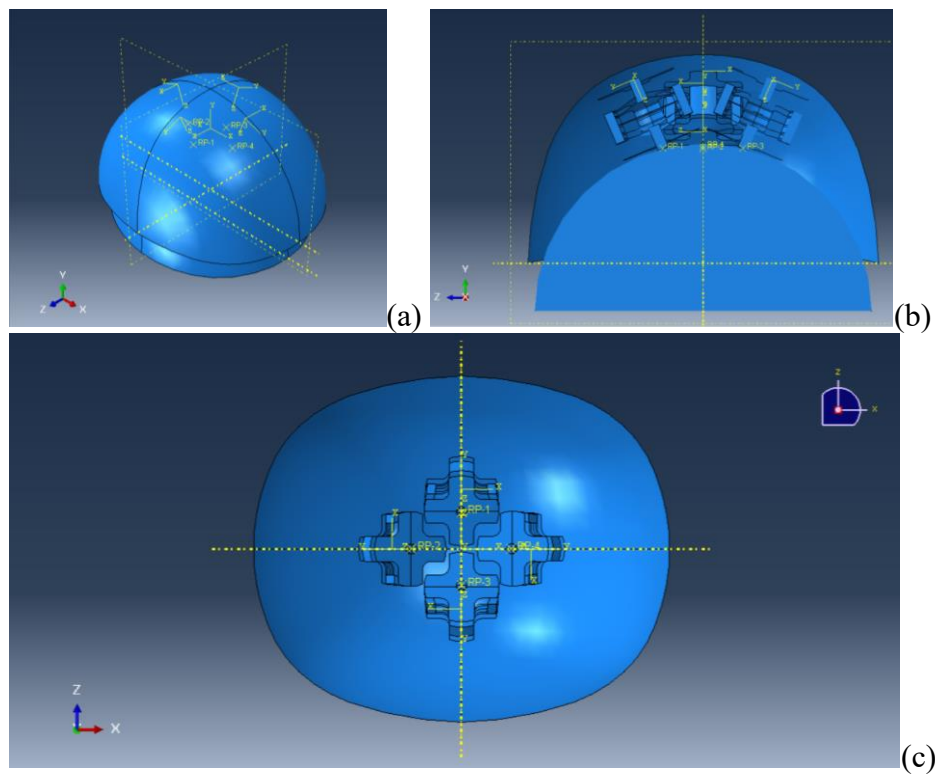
Assembly of the conformal elements, head form and helmet shell- (a) Isometric view of the assembly, (b) Section View, (c) Elements positioned on the helmet shell.
